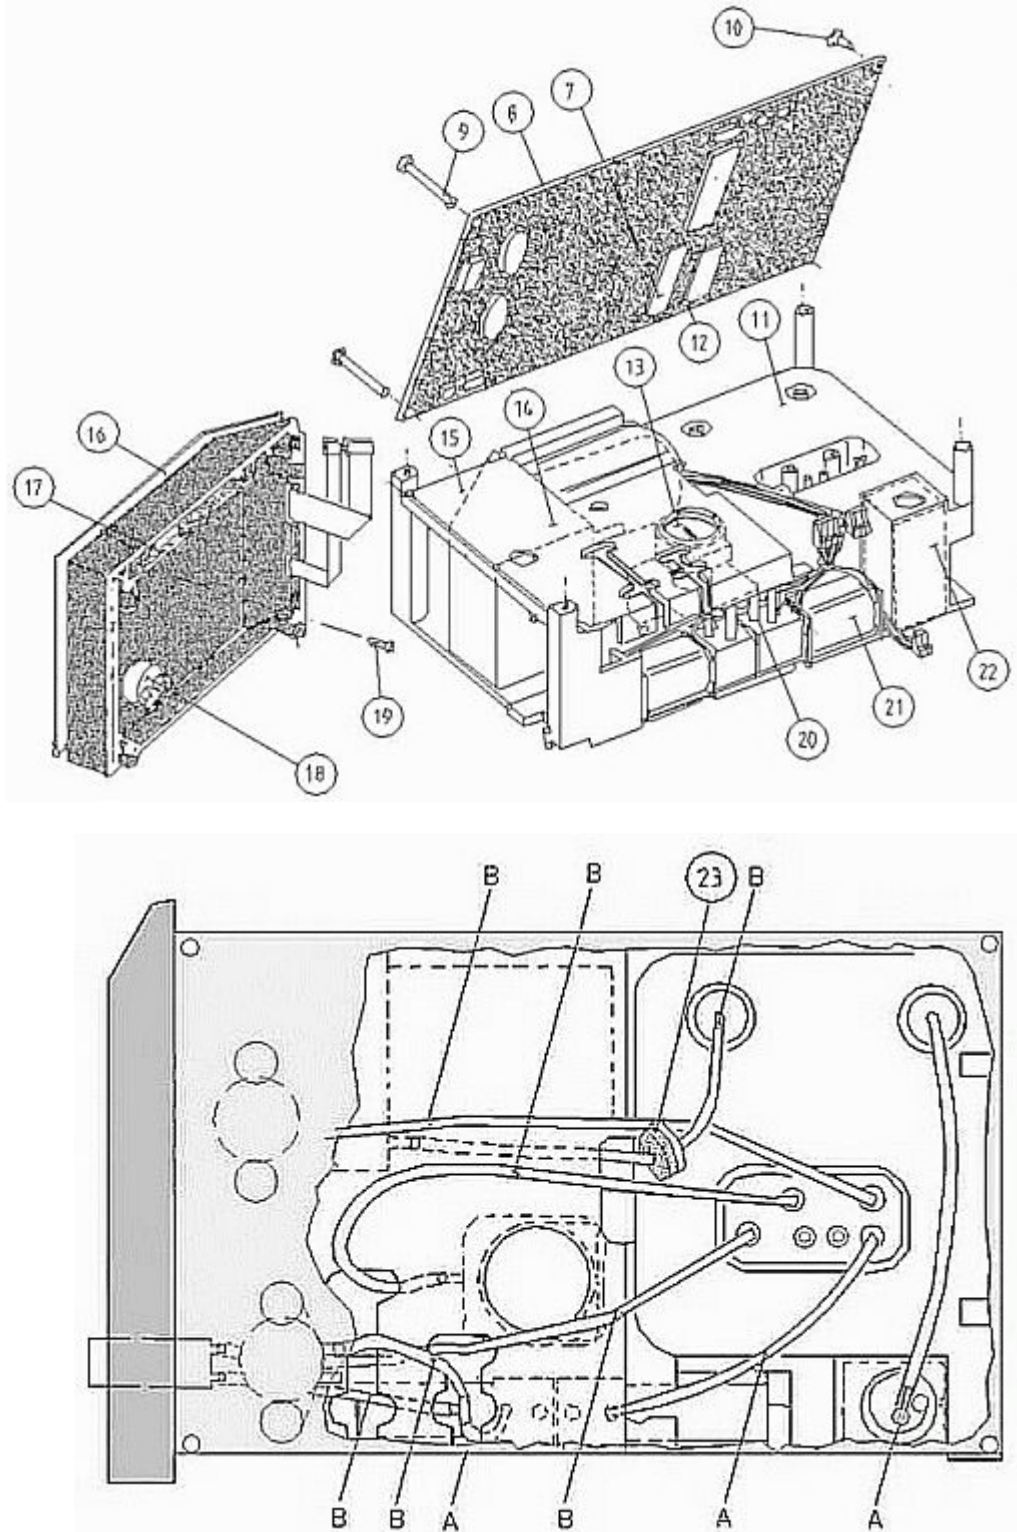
Exploded view of the M-NIBP module, rev. 00-03
